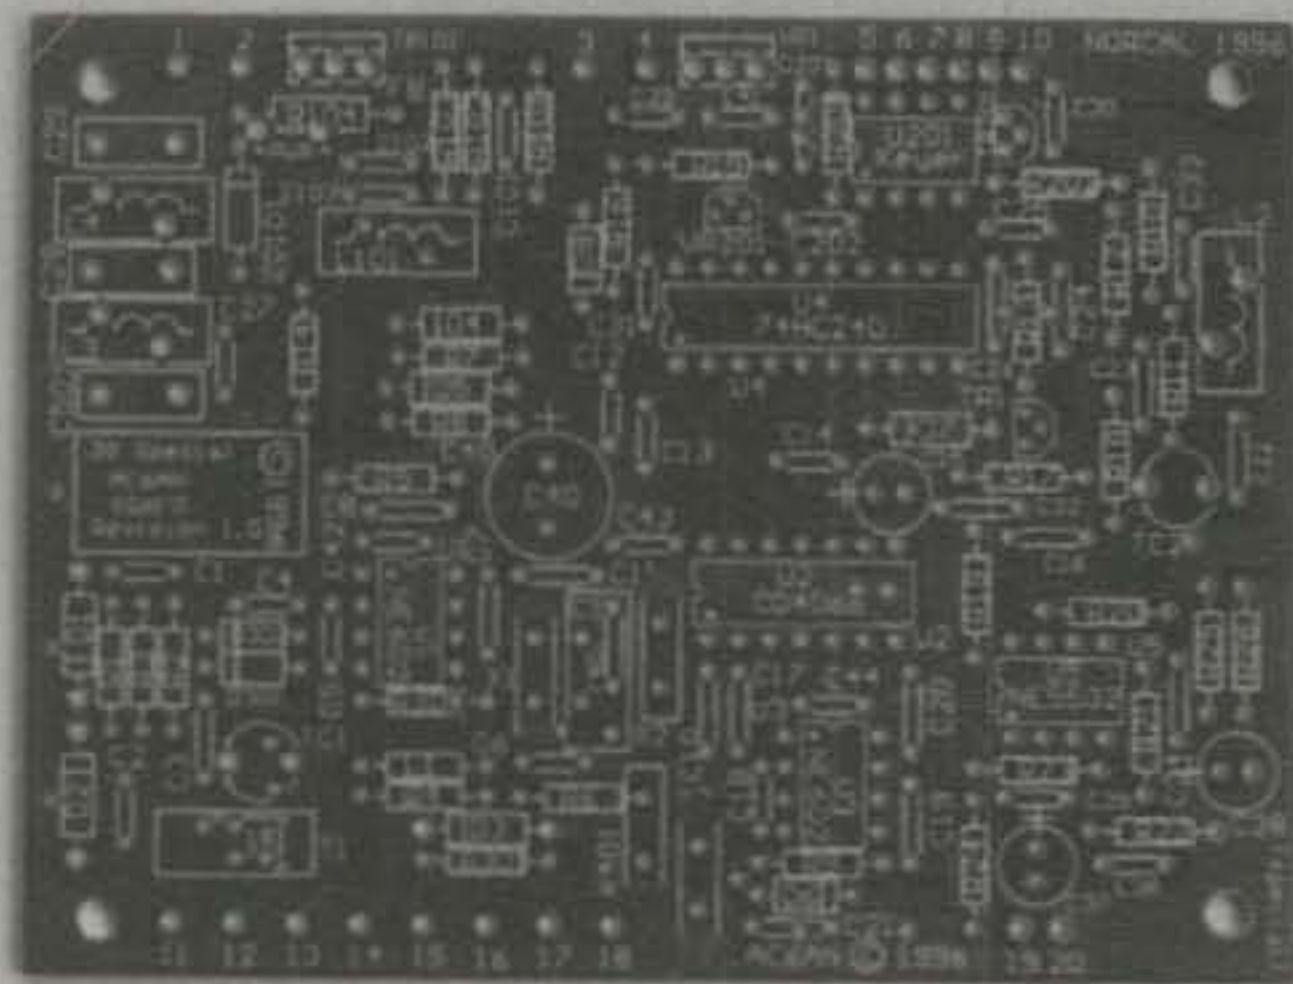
PC board of the 38 Special measures 3 by 4 inches, has plated-through holes to minimize intermittent connections, and has silk screening to easily identify parts locations.
